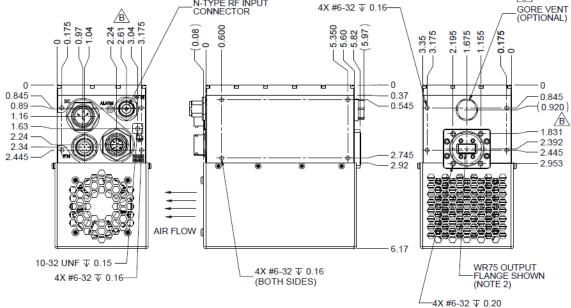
40-80W Ku GaN BUC/SSPA, Fan Cooled
